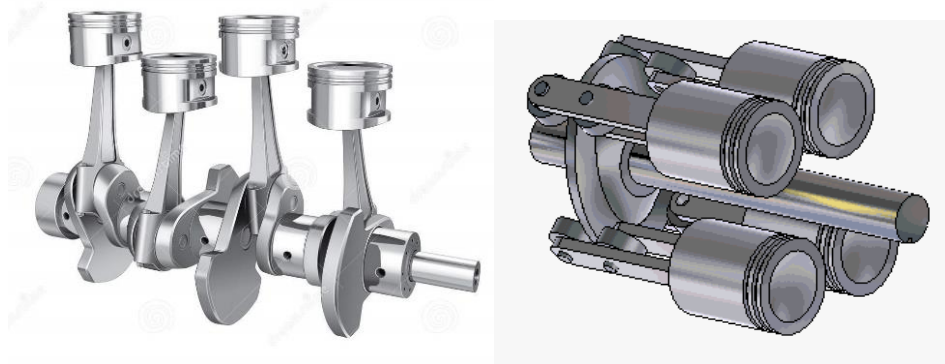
Reciprocating to rotational motion system conversion. Crankshaft on the left and swash-plate on the right.
